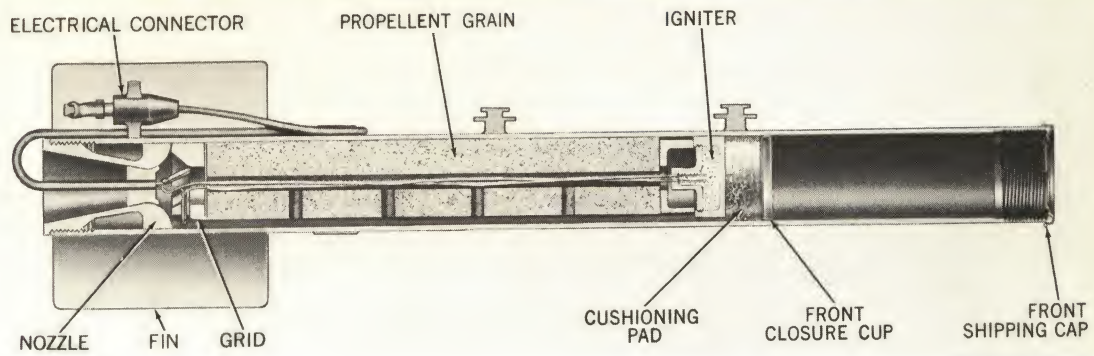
2.25-Inch Rocket Motor Mk 15 Mod 2, Cross Section.
